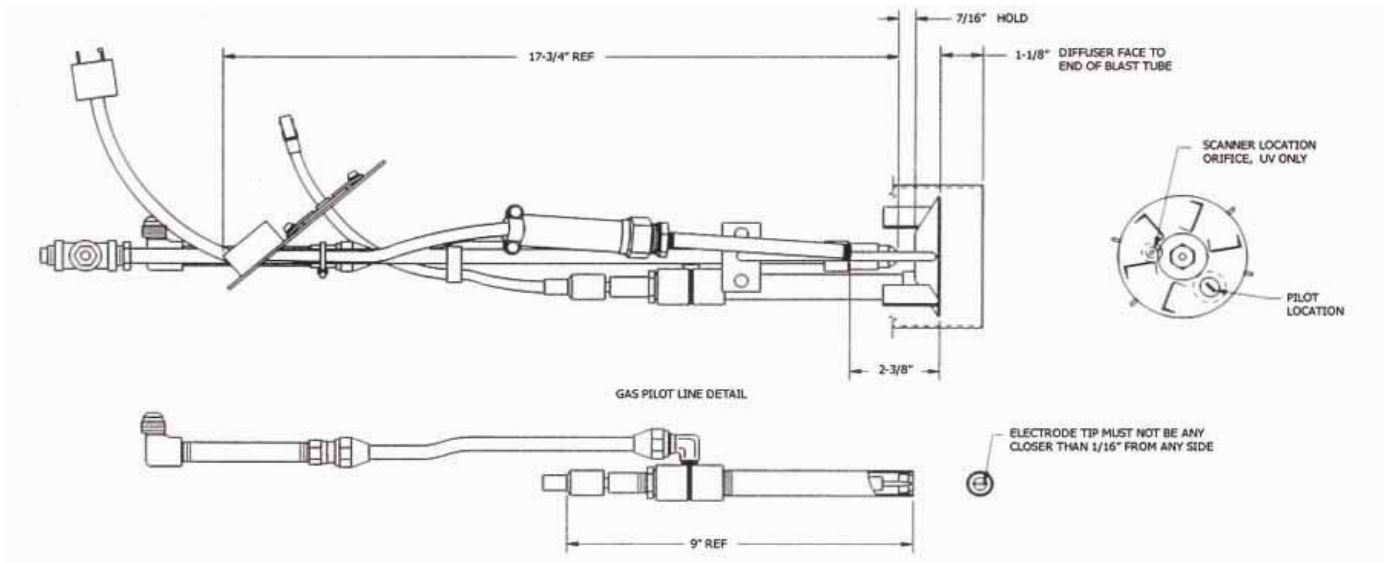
FPL, FPLG 5 & 7 Drawer Assembly with Gas Pilot
